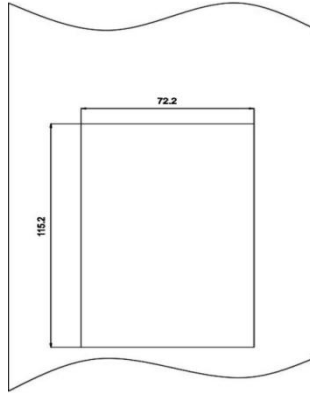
Dimensions of opening holes on the operation panel (keypad)
